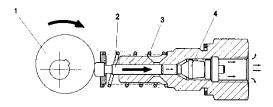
Pump Element – Cross Section View 1-Cam, 2-Piston, 3-Spring and 4-Check Valve.
